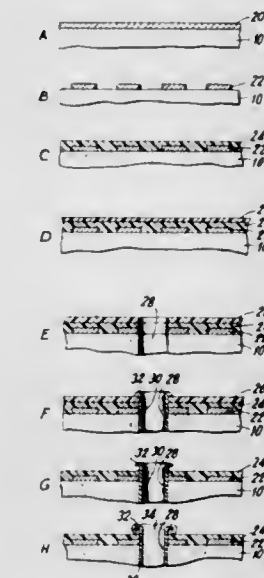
PLATED THROUGH HOLE PRINTED CIRCUIT BOARDS
